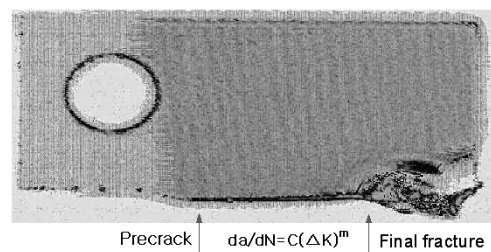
Fatigue fracture surfaces of weld metals for QLT
